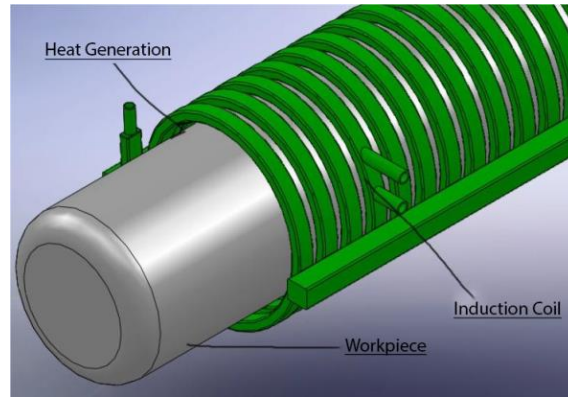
Heating inductor and workpiece (Isıtma indüktörü ve iş parçası)
